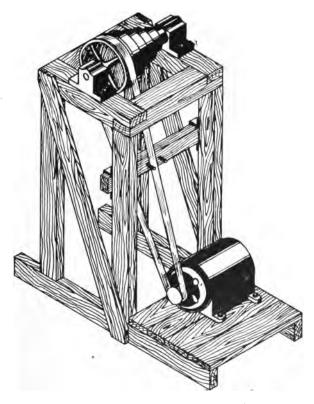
CONSTRUCTION OF TEST MOTOR RACK FITTED WITH CONE PULLEY
